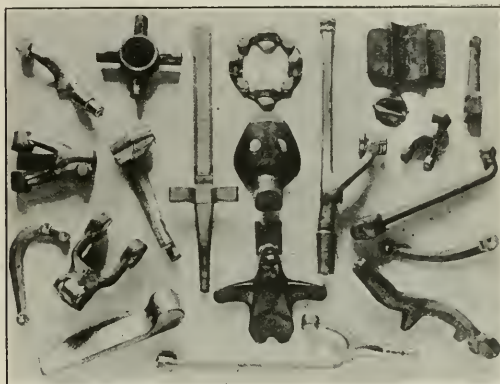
FORGINGS MADE FROM DIES CUT IN A DUPLICATING MACHINE
